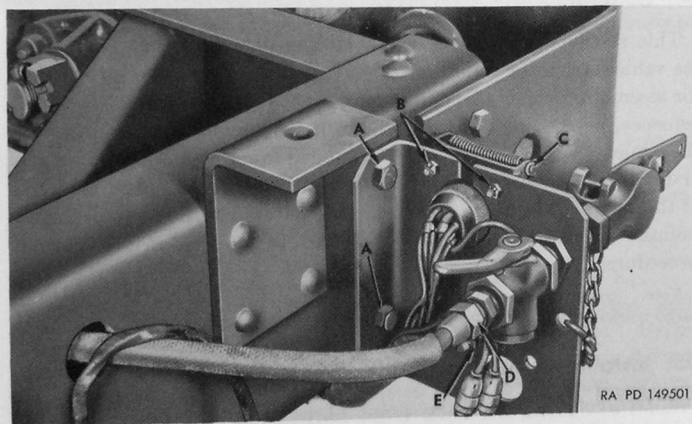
Left trailer air connection and tail light bracket disconnect points.
